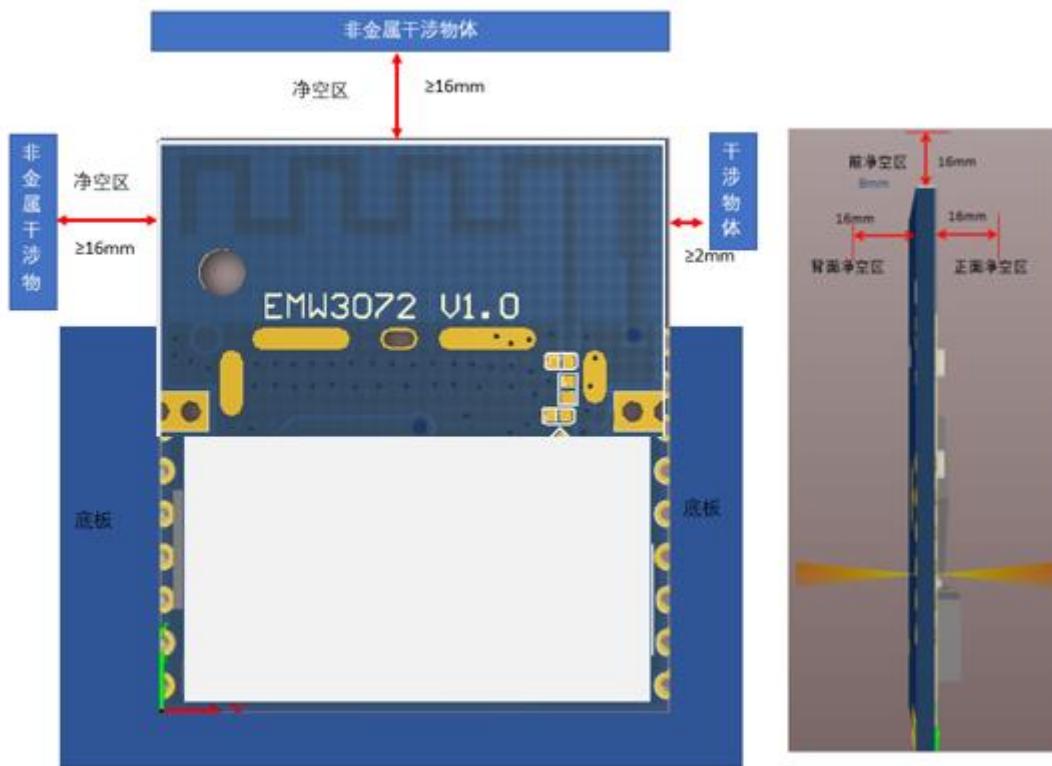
PCB Minimum clearance area of antenna (Unit: mm)
